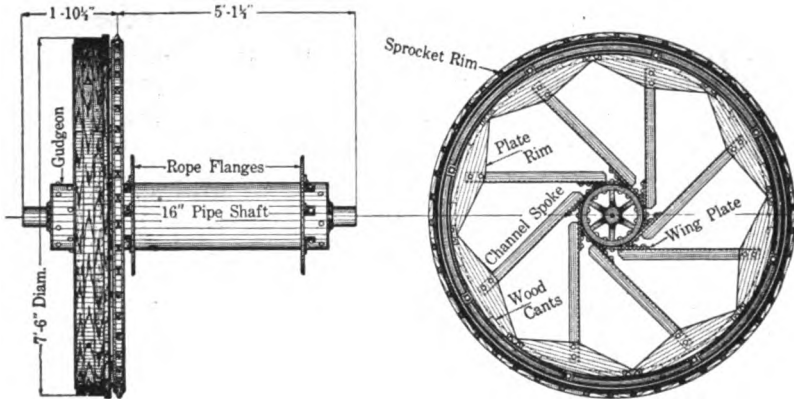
Carnegie Steel Calf Wheel, Detail Diagram.
